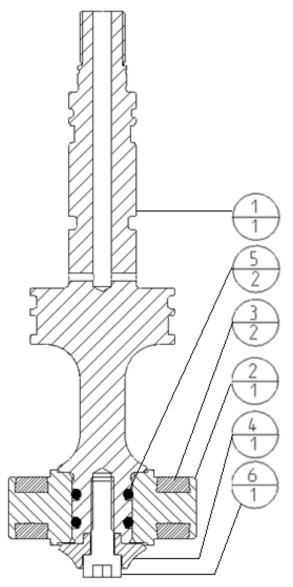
Spool assembly CO 3 way pneumatic valve size 2": stainless steel casting or aluminum casting
